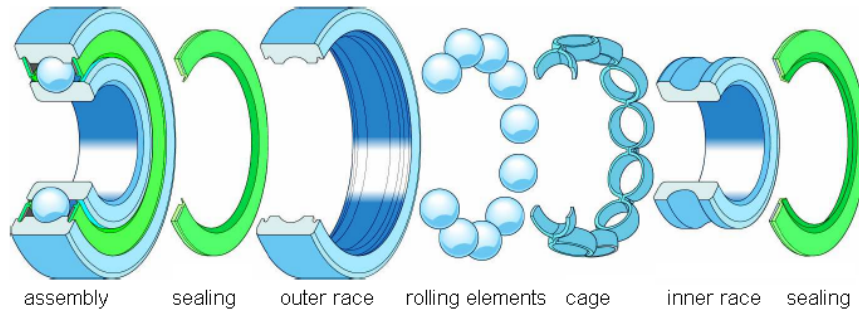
Rolling element bearing components (a ball bearing is depicted).
